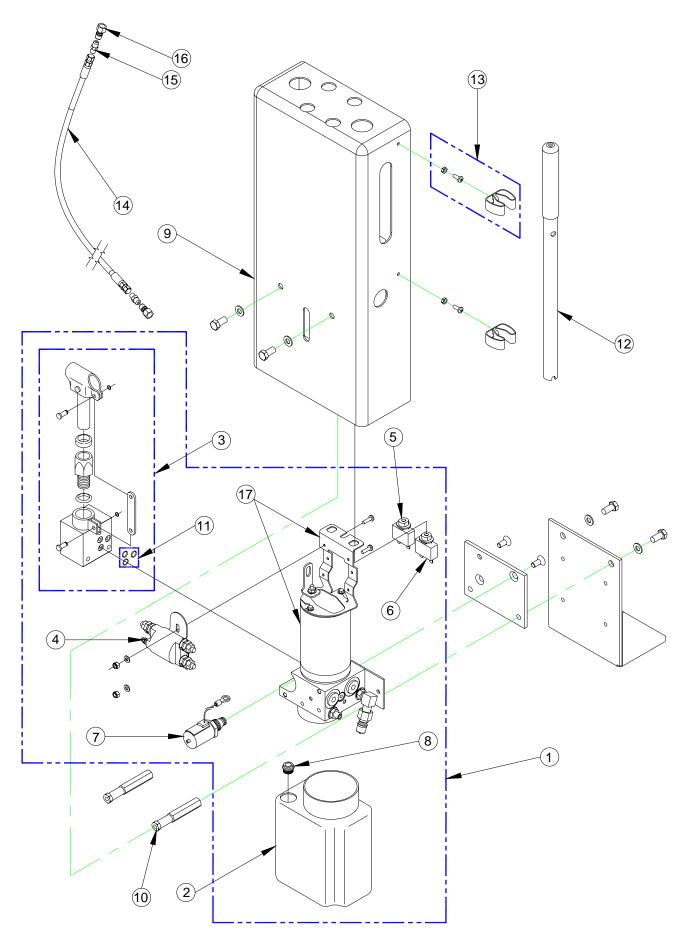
HYDRAULIC PUMP ASSEMBLY 32DPH02.B
